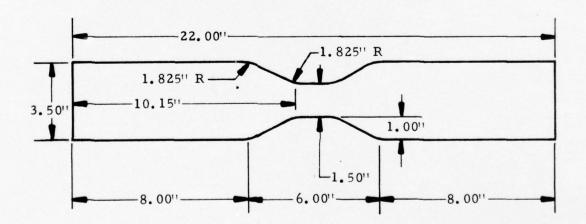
B FLEXURAL BEAM SPECIMEN - CONFIGURATION
